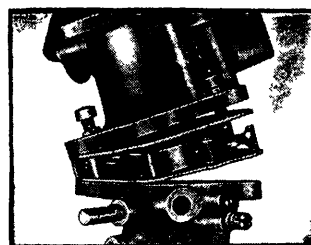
Remove body flange and insulator from body. In 1936 and prior models, vent tube in diffuser bar in venturi should be removed with screw driver and cleaned with air. In 1937-38 models, vent tube can be serviced by removing rivet plug under bowl directly below main metering jet. Never reuse old vent tube or plug
